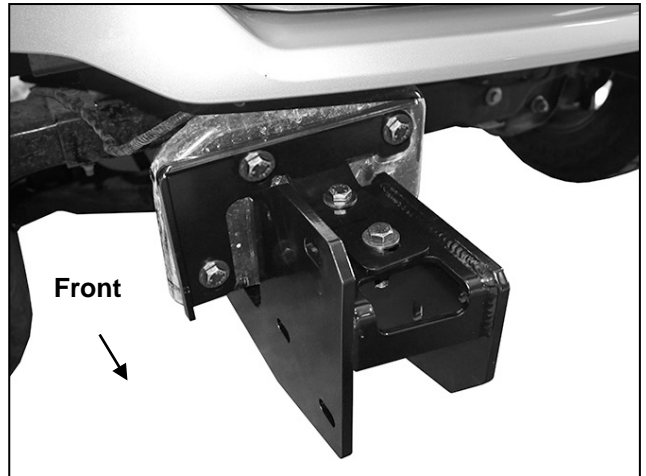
Passenger/right Frame Bracket attached to bottom of frame and Double Nut Plate
